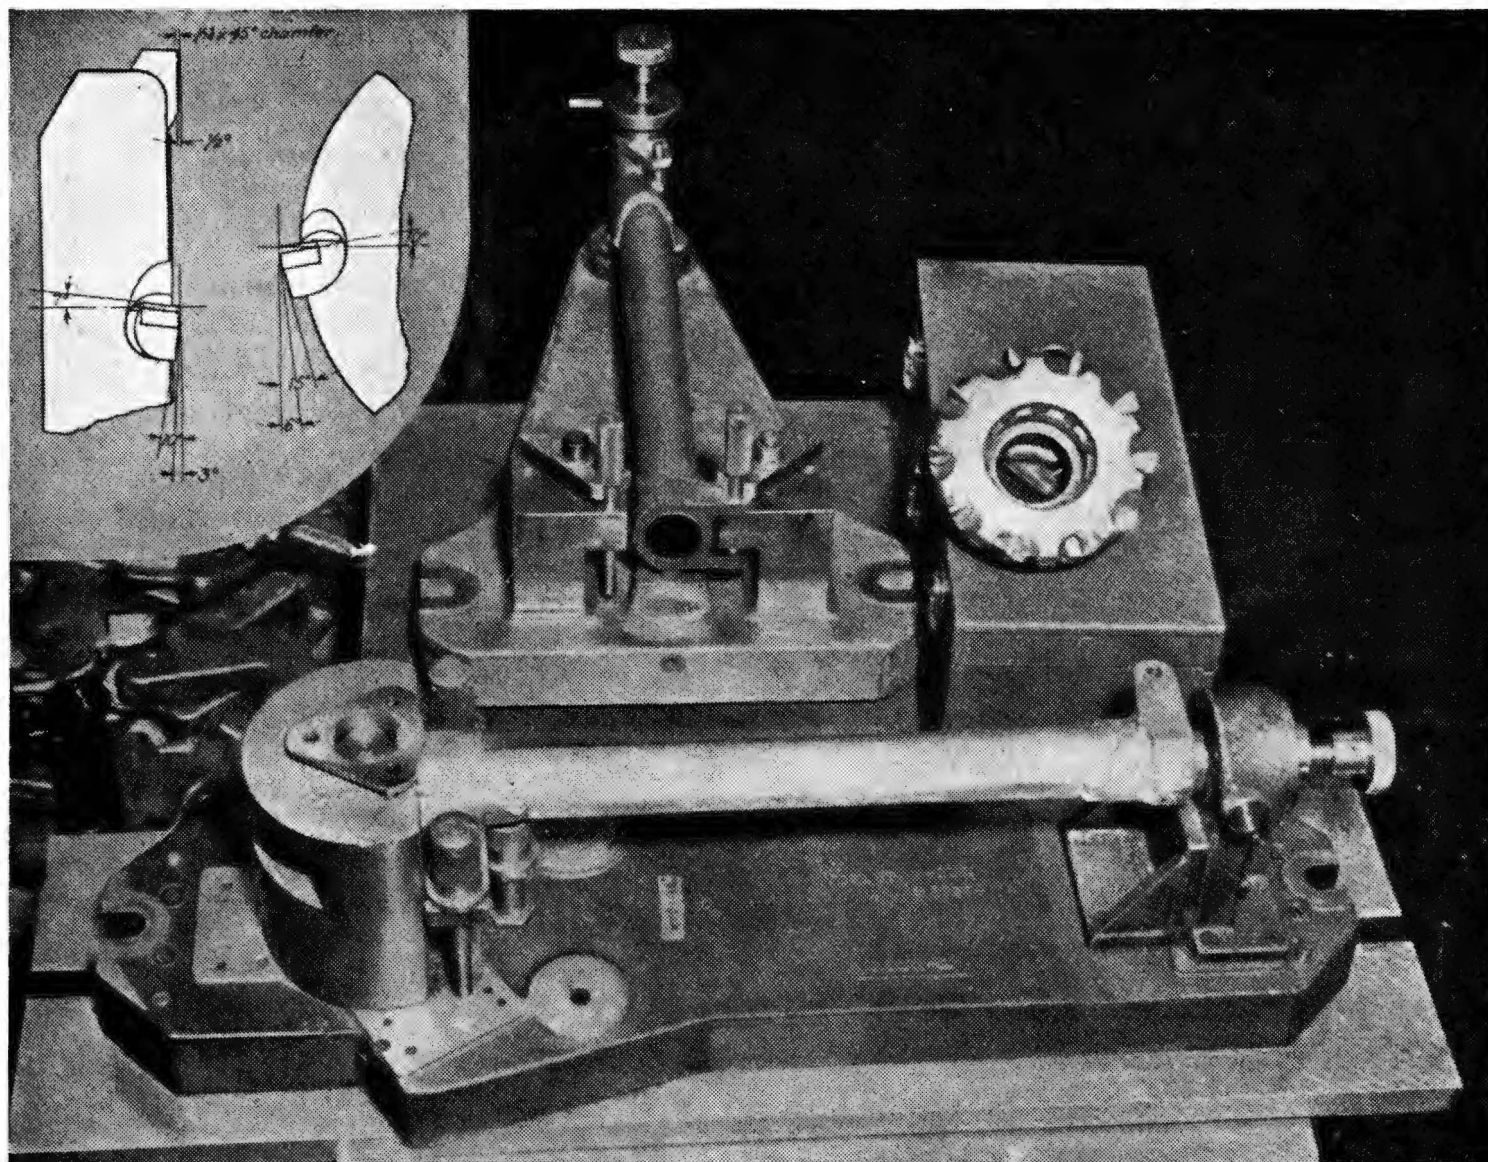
Two fixtures and the cutter employed in milling forgings welded to the ends of a landing-gear compression-link assembly (see piece 5 in table on Fig. 4). The cutter is 6 in. in diameter and turns at 489 r.p.m. Feed is 15 in. a minute. Forgings are heat-treated to 165,000 lb. per sq. in. tensile and 36 to 37 Rockwell C. Chips come off red hot. Some critical dimensions are held within 0.002-in. or closer limits, the cuts being so smooth as to appear ground.
